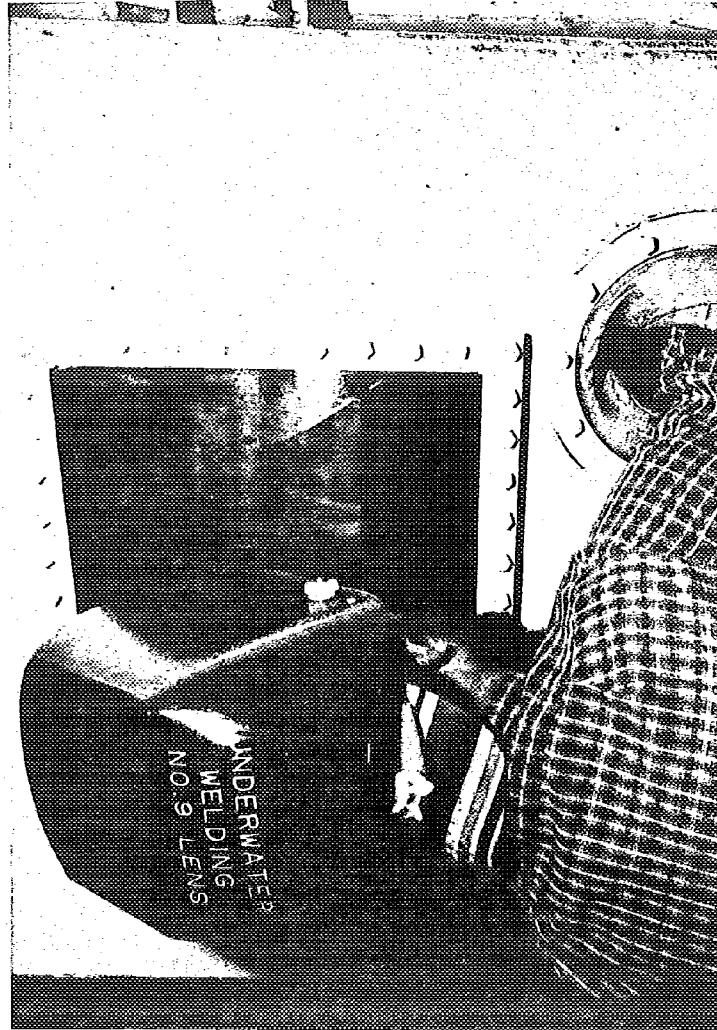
'Glove-box' filling, preparatory to welding vertical butt plate
